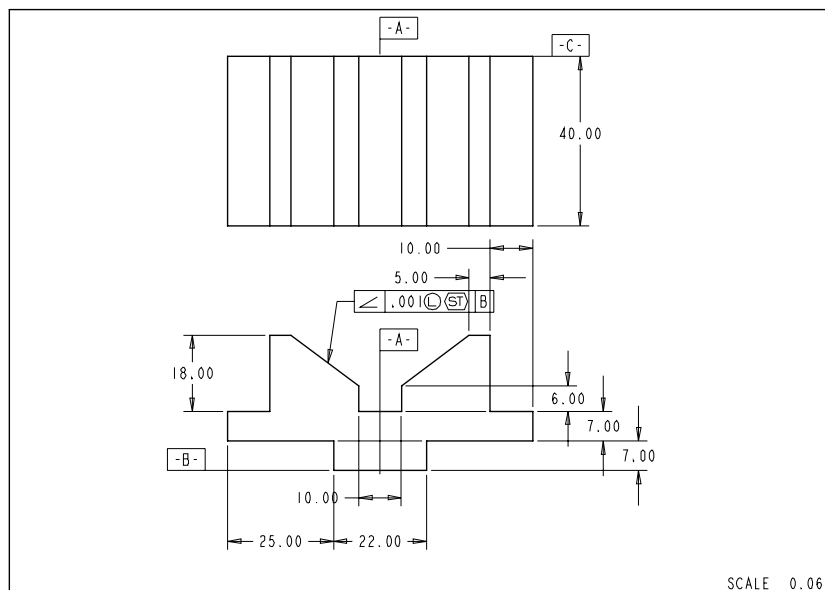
Top and the front views of the model with the dimensions, datum planes, and the geometric tolerances
